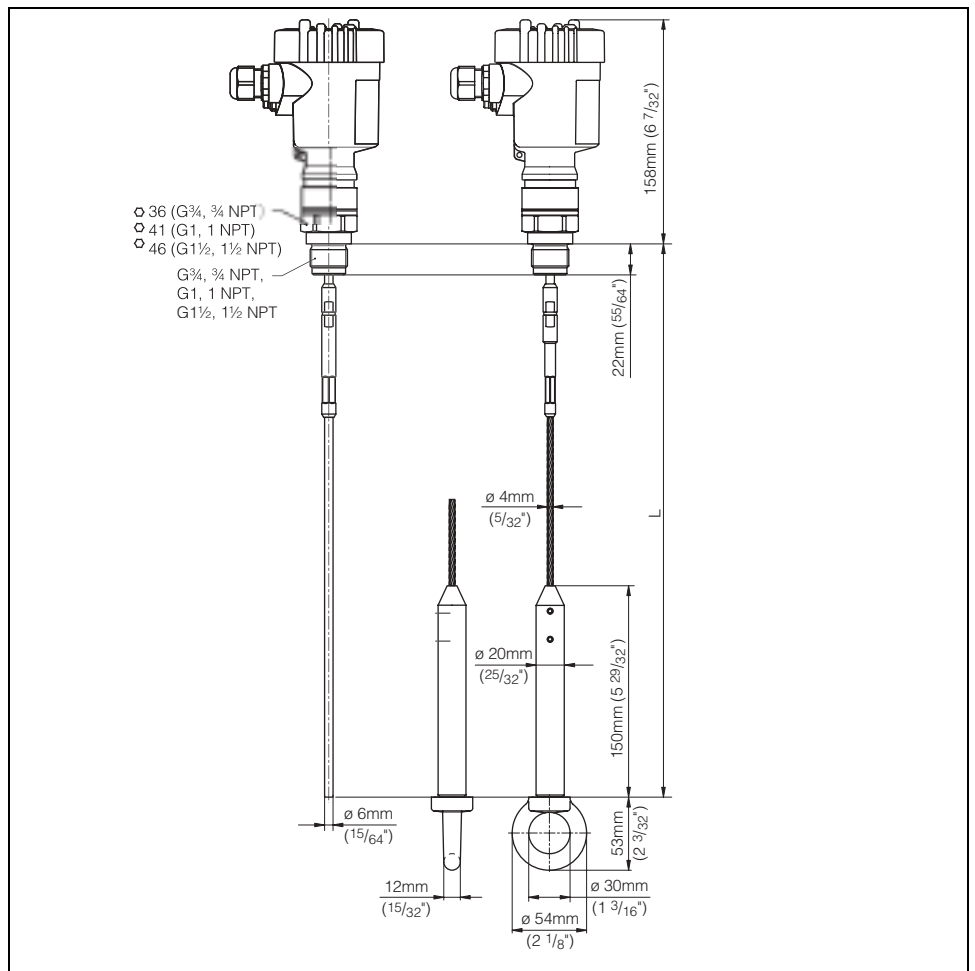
VEGAFLEX 61 - Cable and rod version with thread
